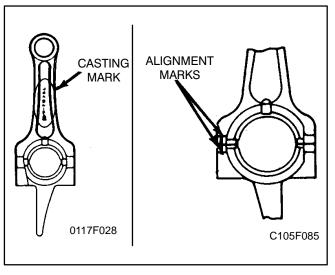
CONNECTING ROD AND CAP MARKINGS
